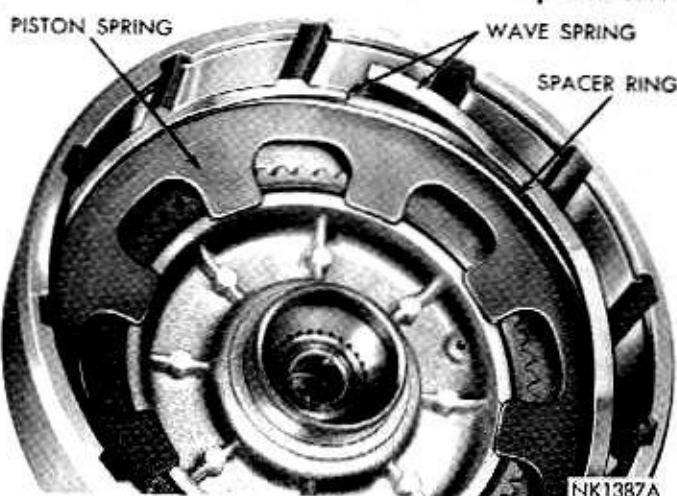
Installing Rear Clutch Spring, Spacer Ring and Wave Spring
